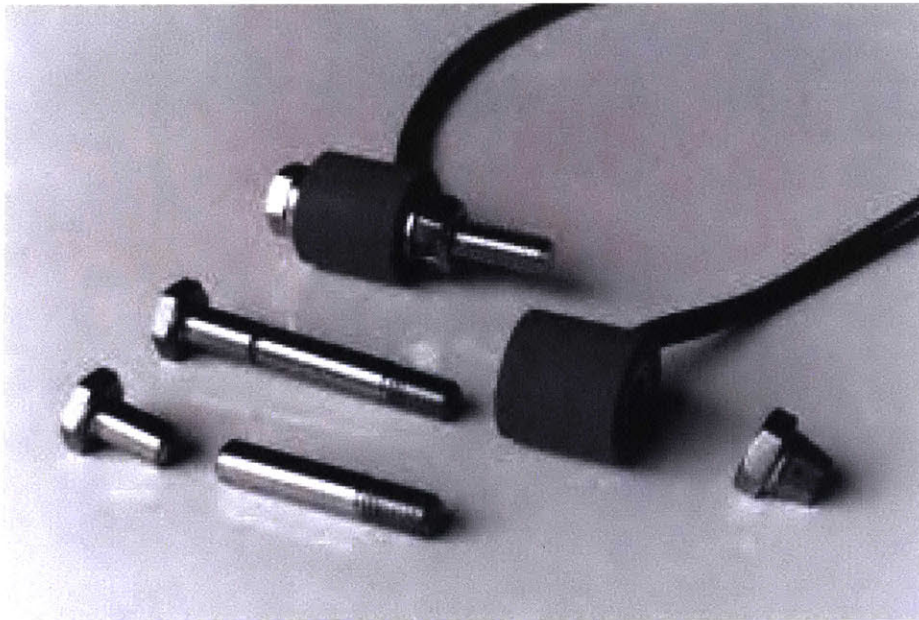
The components of the Frangibolt before and after fractures.[1]
